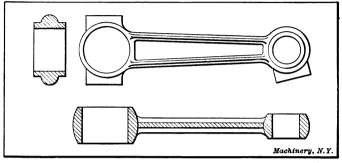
Connecting-rod Forging, after Machining, to illustrate a Case where Parts of the Die Impression should be milled and typed before the Hub Impressions are milled
